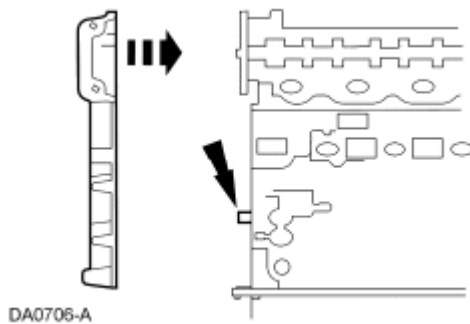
Installing Engine Front Cover Gasket On Engine Front Cover
